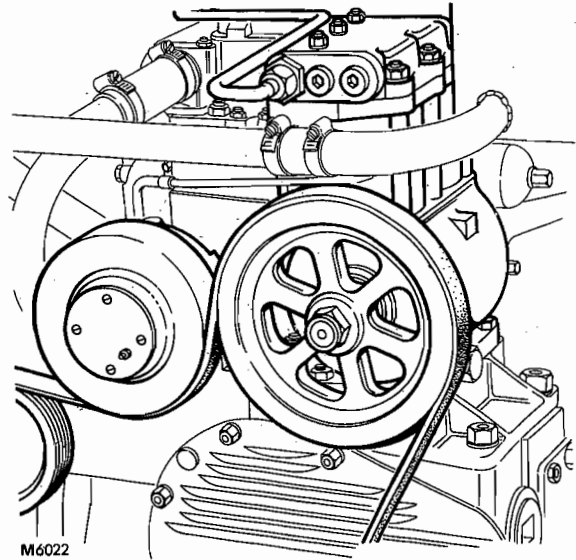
COMPRESSOR IN POSITION ON ENGINE
